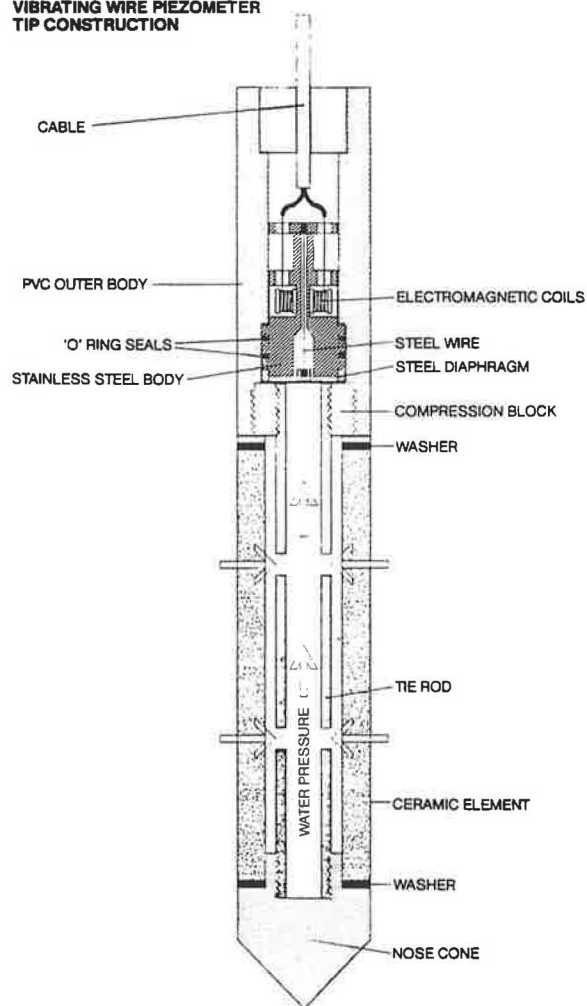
Vibrating wire piezometer (Courtesy of Geotechnical Instruments, Inc.).
